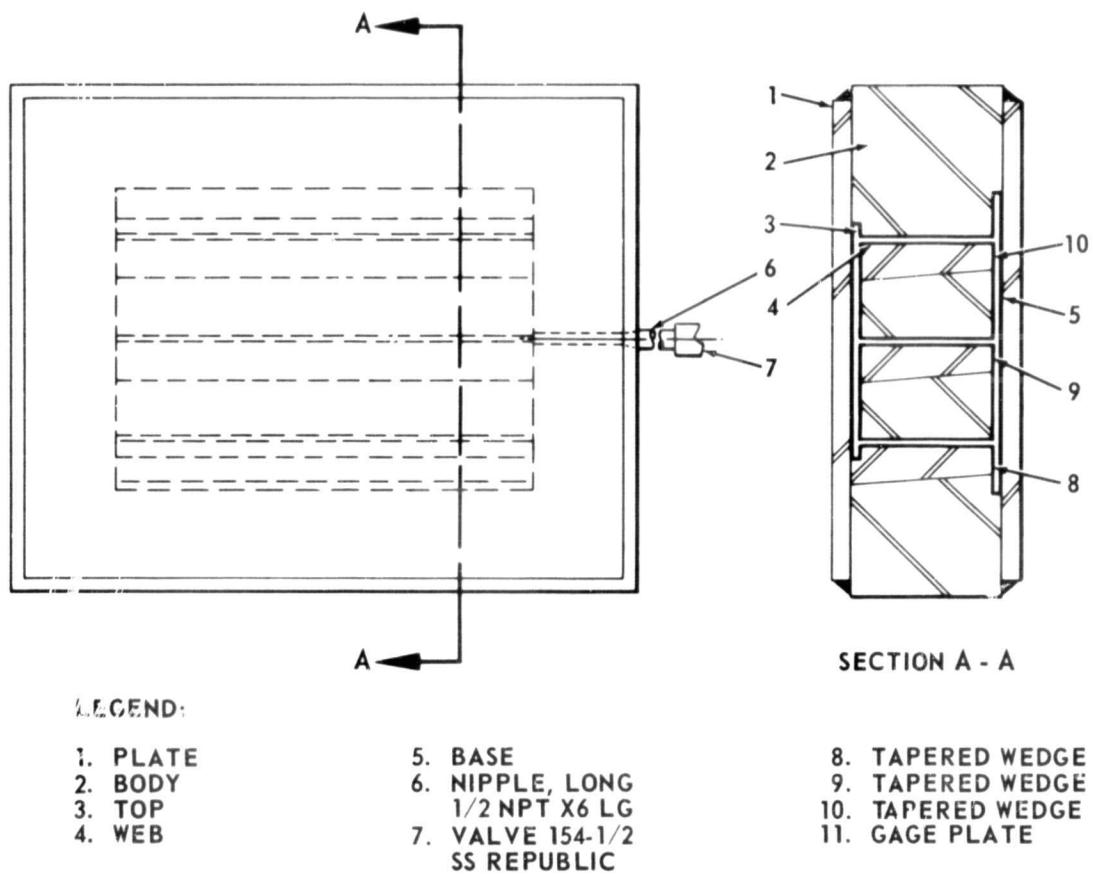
ROLL DIFFUSION BONDING PACK "C" (DRAWING MR&T-SK-1116)
